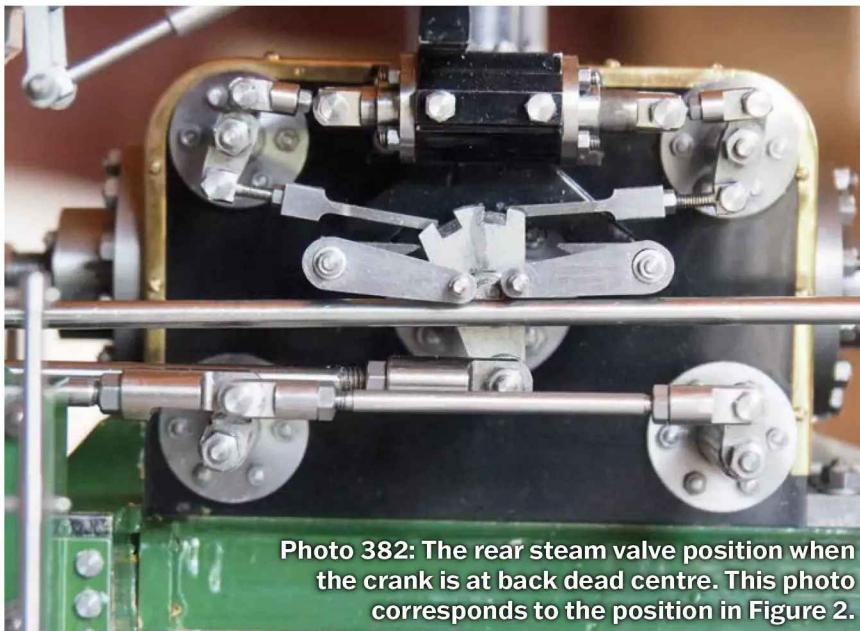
The rear steam valve position when the crank is at back dead centre. This photo corresponds to the position in Figure 2.
